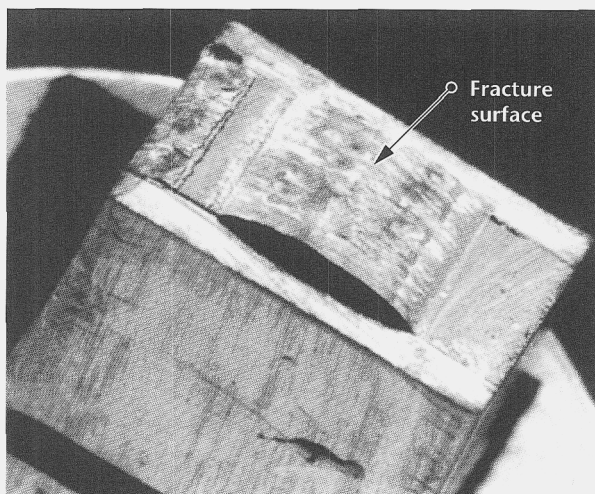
Macro-photograph of a typical fractured sample. The fracture surface is indicated. Final fracture occurred along an arc in the gage section due to intense plastic shear.
